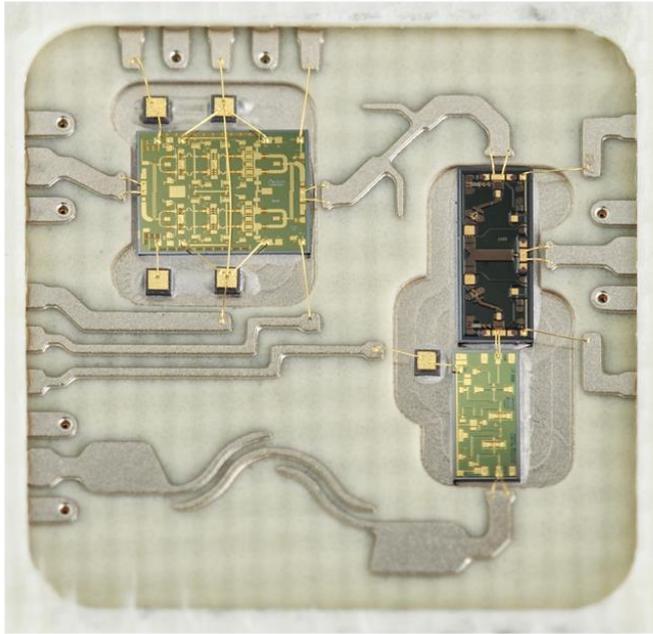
Photograph of a 39GHz PA in a 5mm x 5mm air cavity QFN with eval PCB
